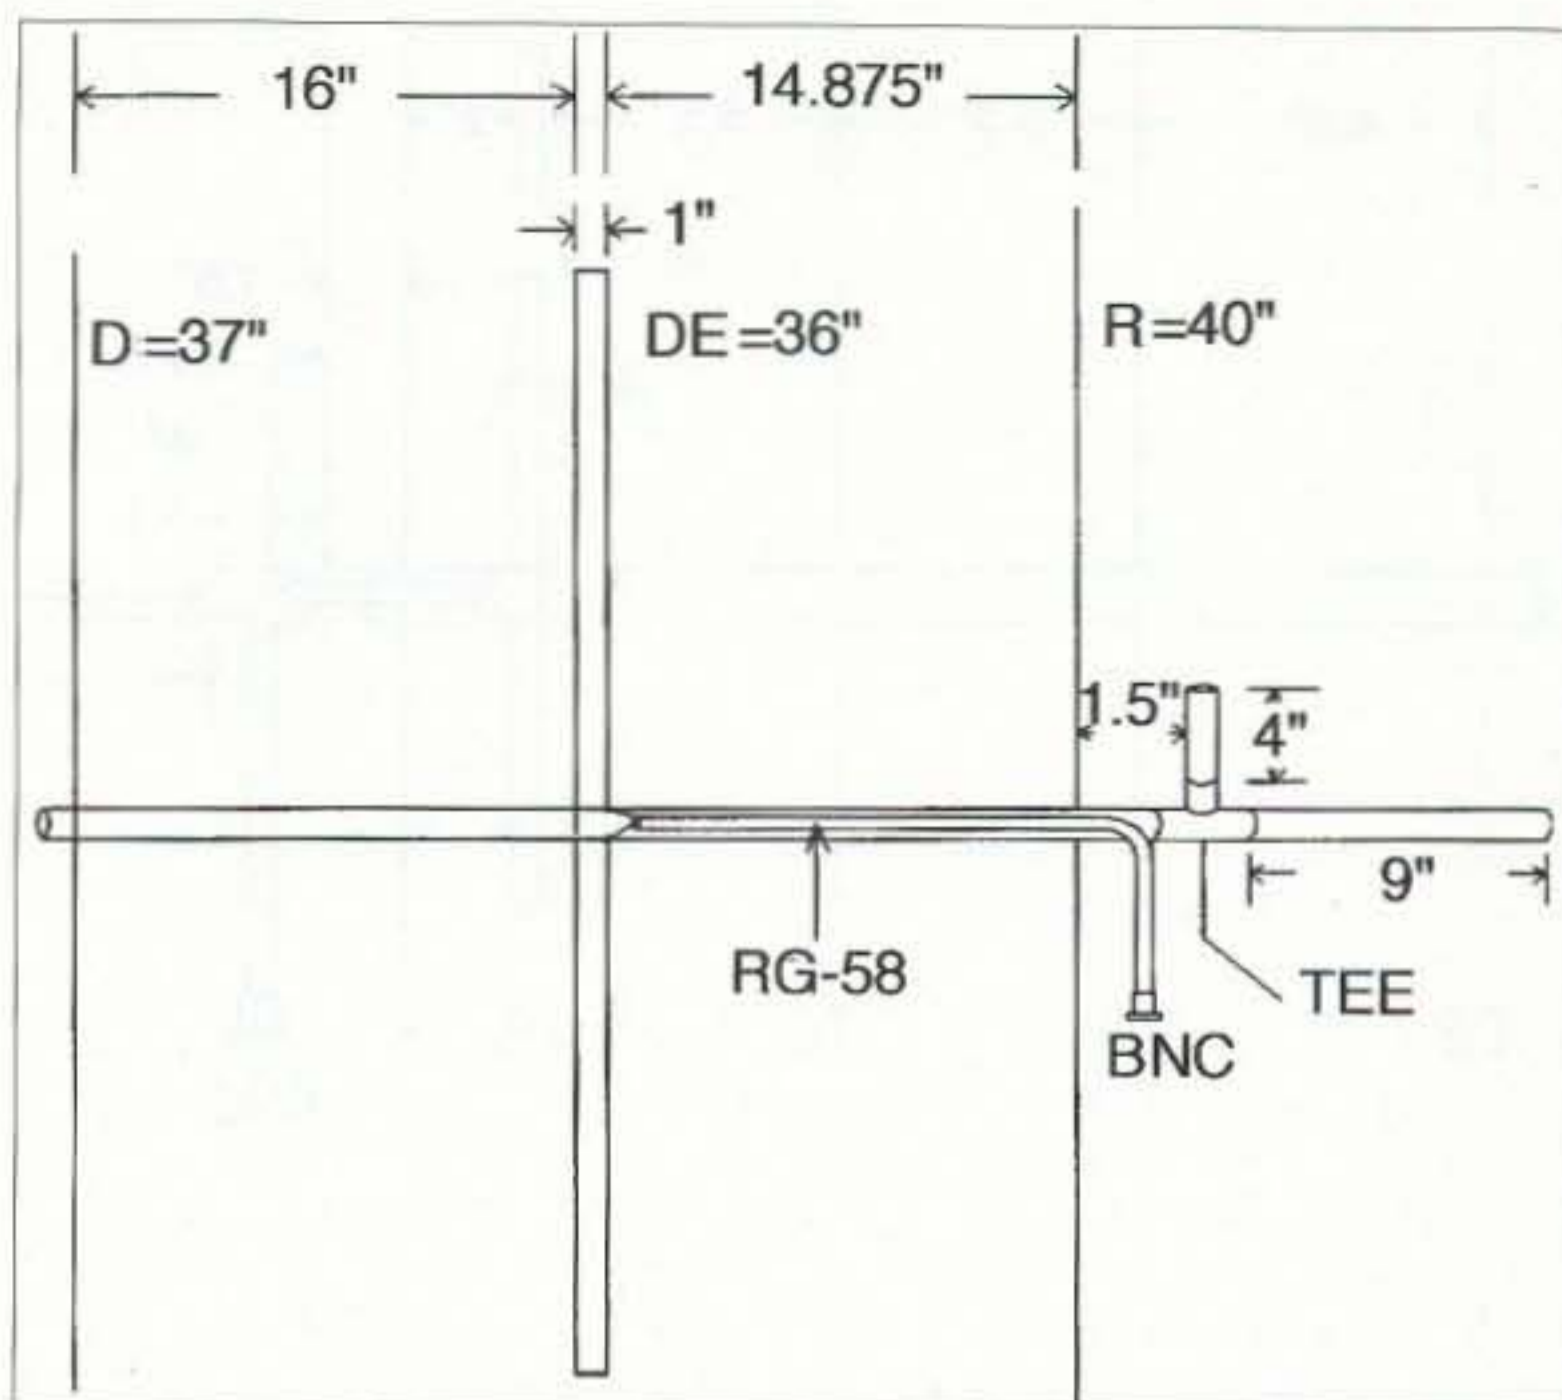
Dimensions and construction of the 2 meter T-hunt beam. The driven element dimension of 36" is correct. The length was adjusted to achieve a low SWR.
